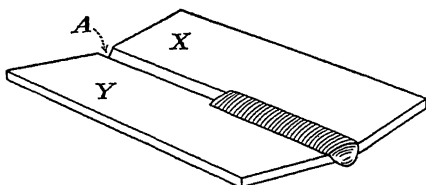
Plates welded without tacking. A, joint; plate X lapped over plate Y.
